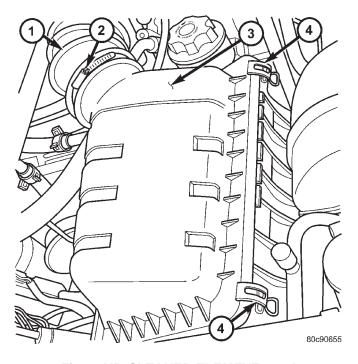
AIR CLEANER ELEMENT - 3.7L
